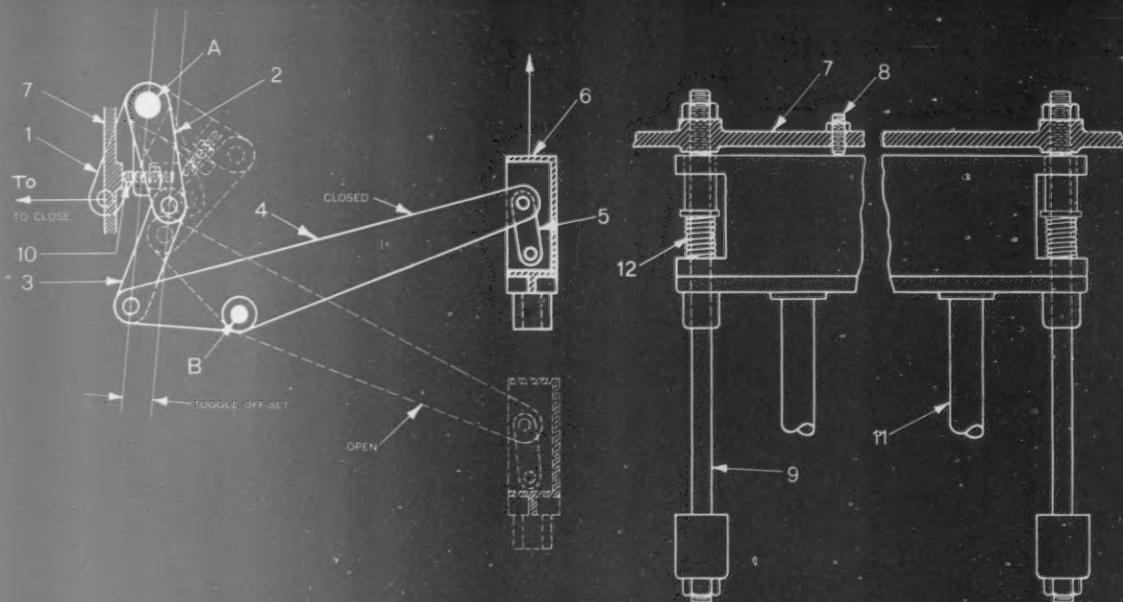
Pole Unit Mechanism for Indoor Breakers.
